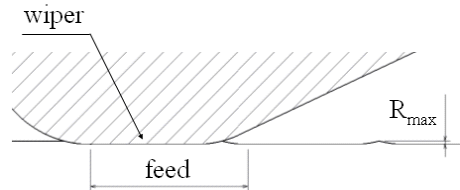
Ideal finishing roughness in turning by wiper cutting tool
